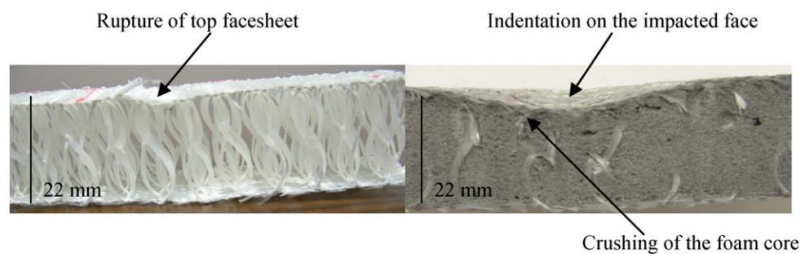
Failure modes of un-foamed and foamed core sandwich panels
